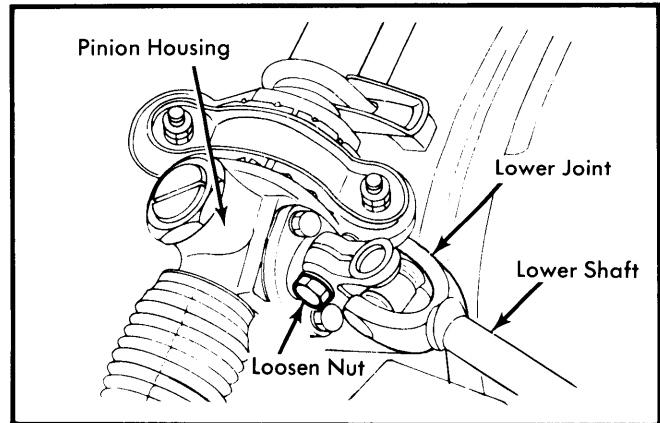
Separating Lower Shaft from Pinion Gear on Manual Steering Models
